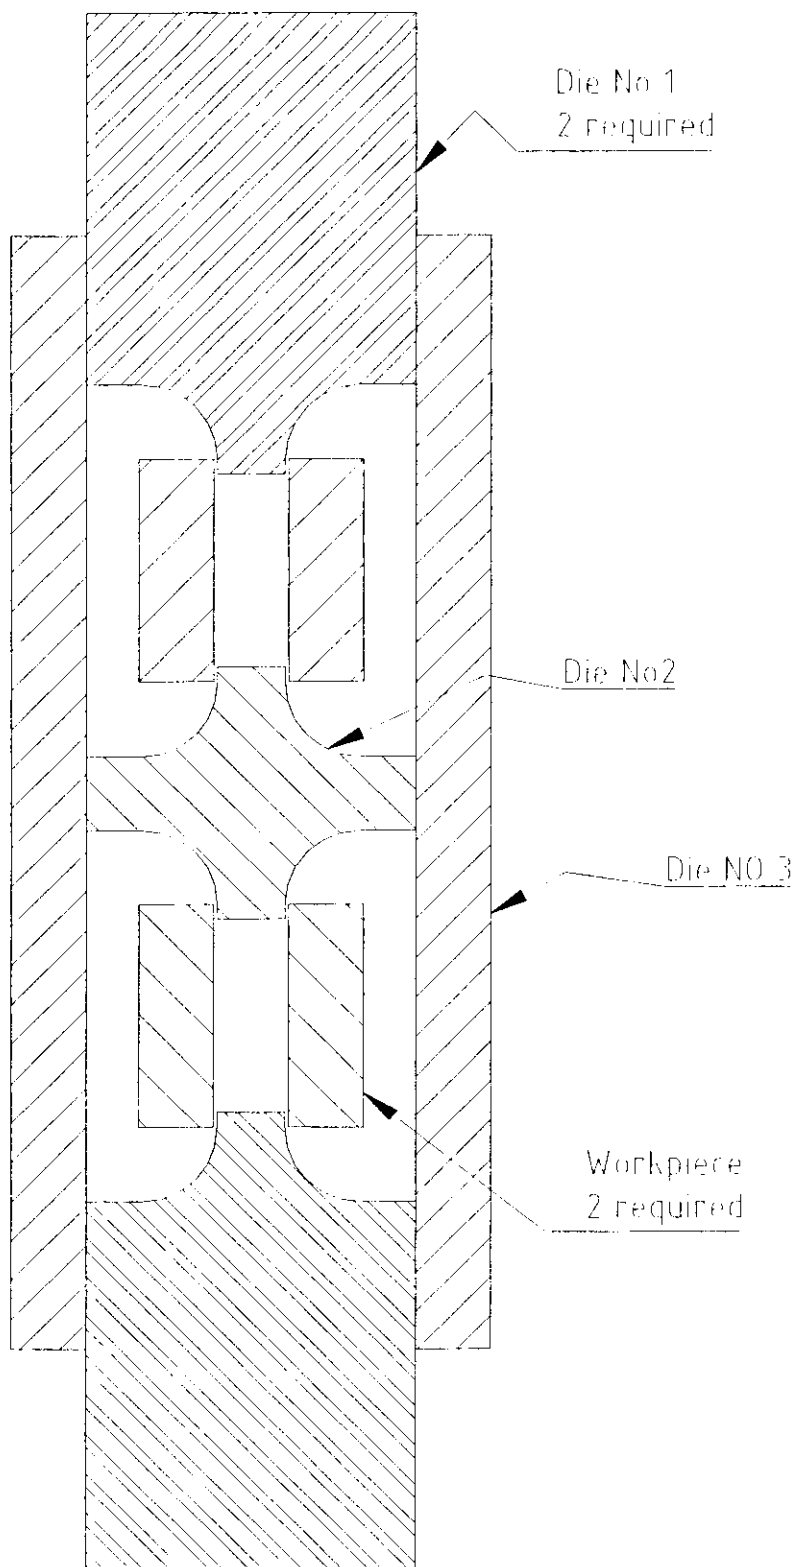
Schematic drawing of the tube inversion test apparatus
